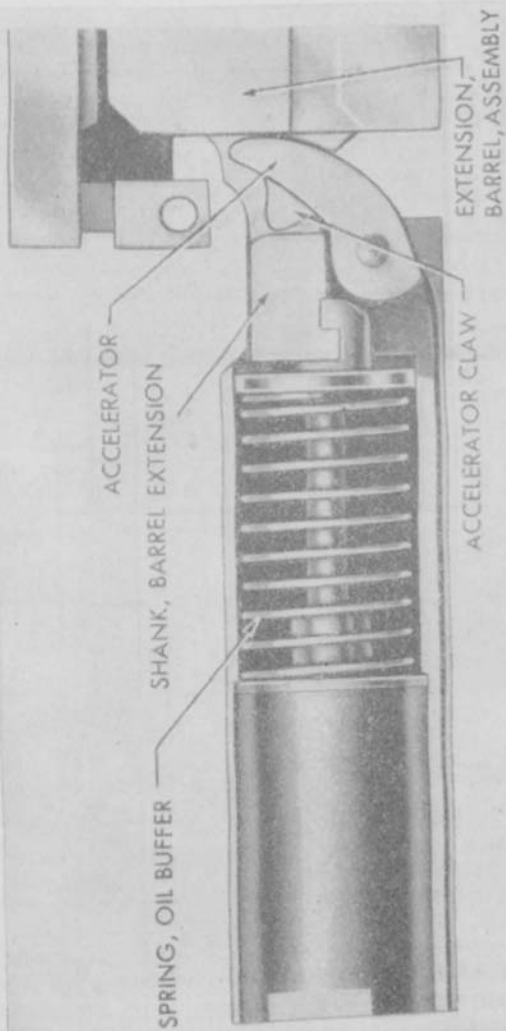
Action of oil buffer spring on barrel extension and barrel.
